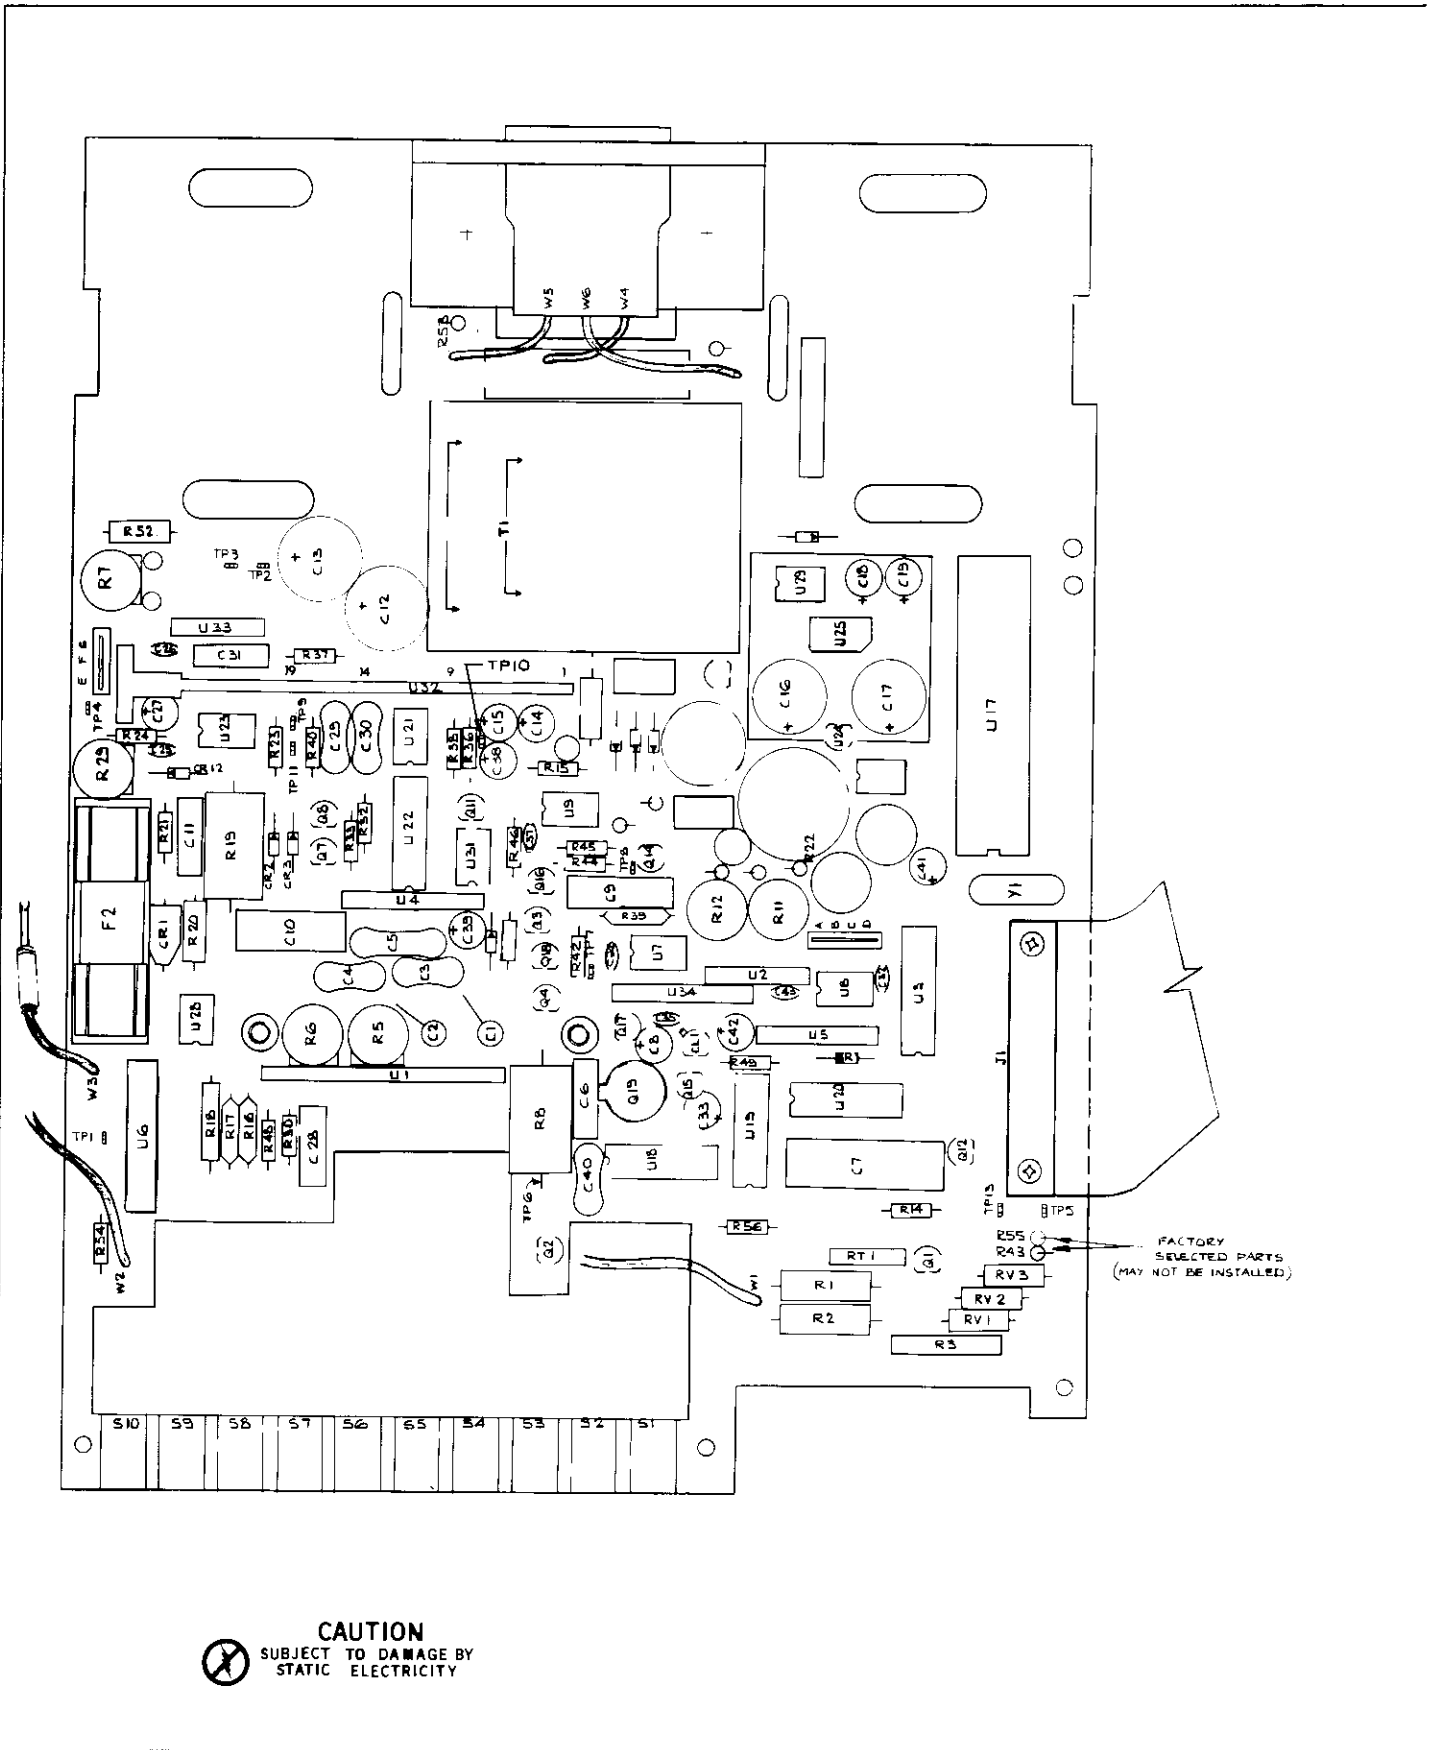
A1 Main PCB Assembly, Battery Option (cont)
